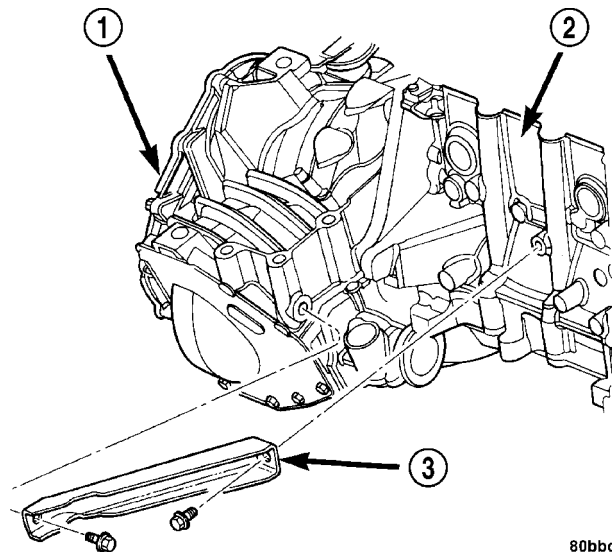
Right Lateral Bending Brace Removal/Installation—Typical
